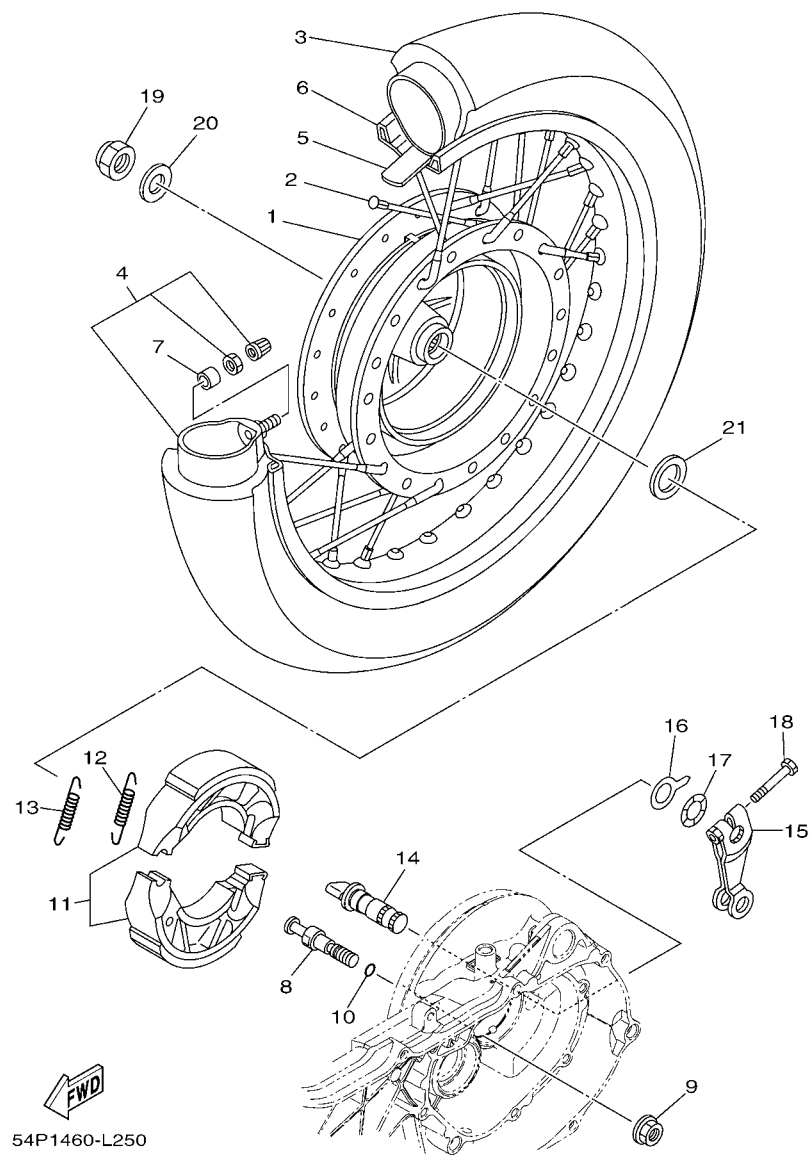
REAR WHEEL FOR SPOKE WHEEL
